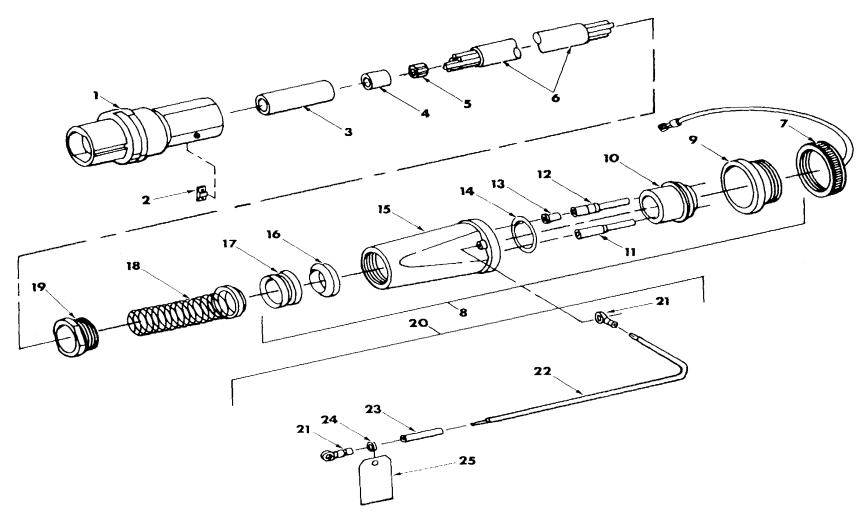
Cable assembly, special purpose, electrical 12011687; connector, plug, electrical MS90557C32412S; connector, plug 12011688; and cable assembly 12011638.
